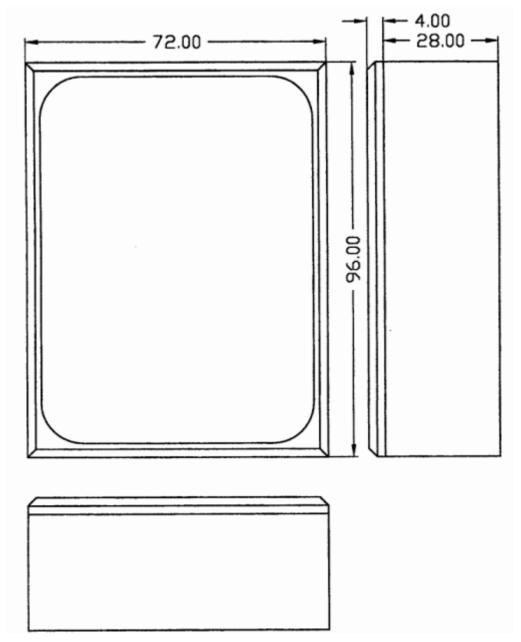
Technical dimensional drawing TERM 5 / TERM 6
